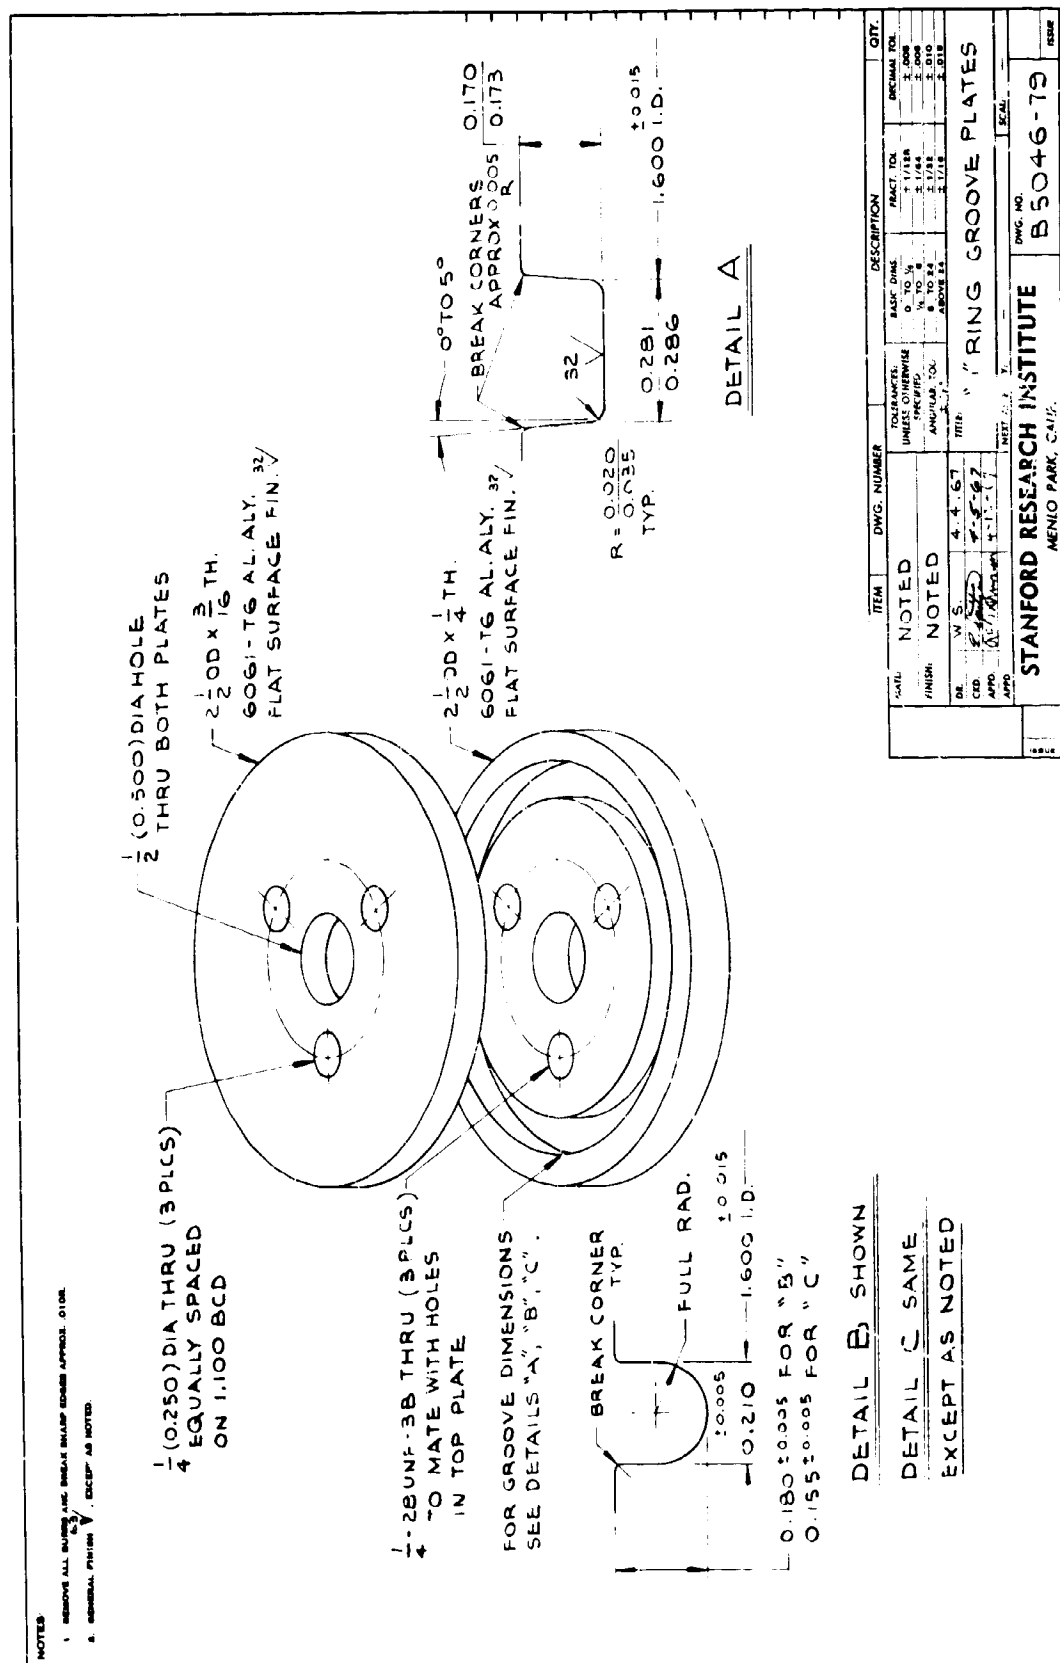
FLANGE TEST FIXTURES FOR DETERMINING VCM RELEASED BY SEALED-IN O-RINGS IN THE THERMAL-VACUUM ENVIRONMENT
